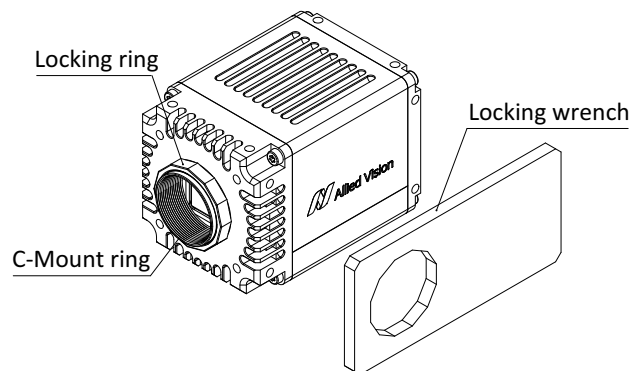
Goldeye Pro G5 camera with C-Mount and locking wrench
